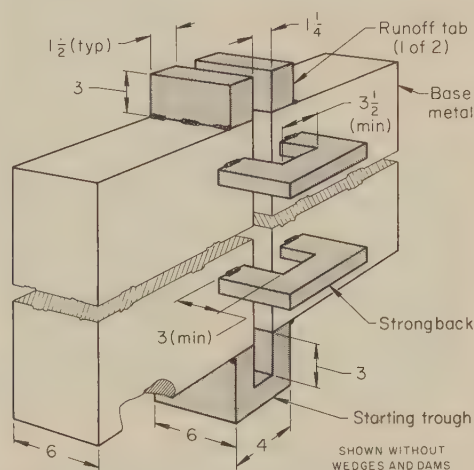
Two 6-in.-thick plates ready for electroslag welding
